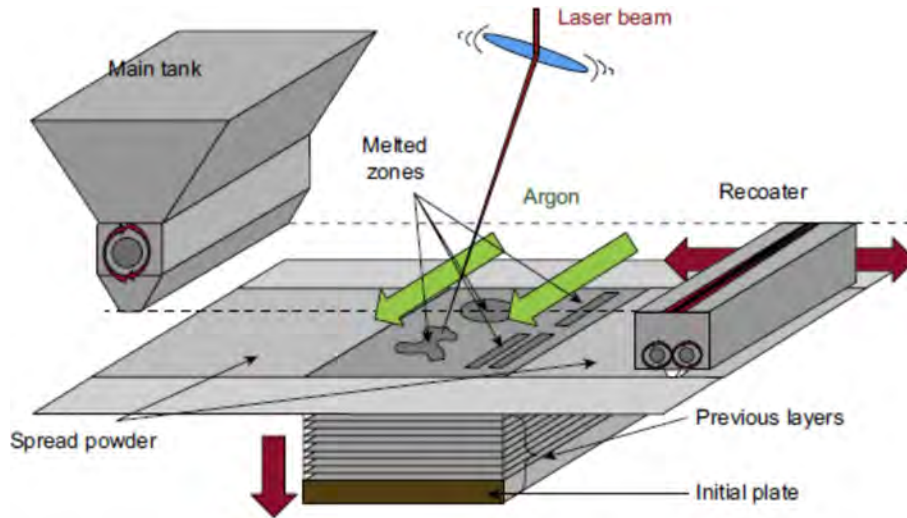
Schematic of the build chamber of a selective laser melting machine, showing the laser beam, build plate, powder recoater, and flow of inert gas. This example uses a hopper to deposit powder (top left), similar to the design of the micro-SLM.
